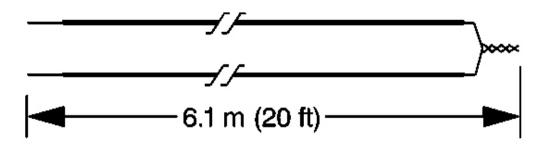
Fabricating 20 Ft. Deployment Harness Courtesy of GENERAL MOTORS CORP.
